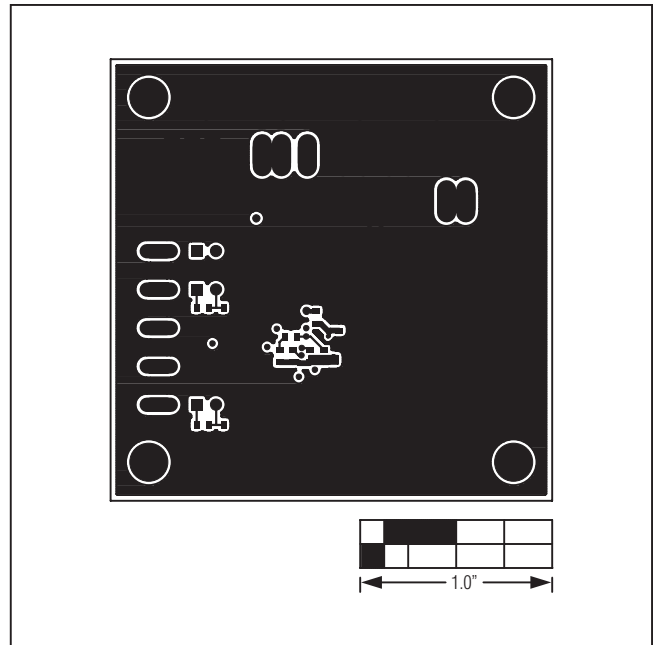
MAX15109 EV Kit PCB Layout—Solder Side
